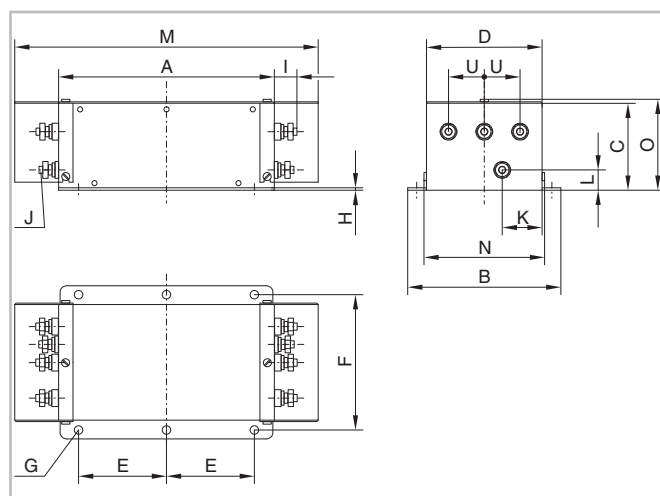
Dimension drawing of RFI filter 3259-250-28
